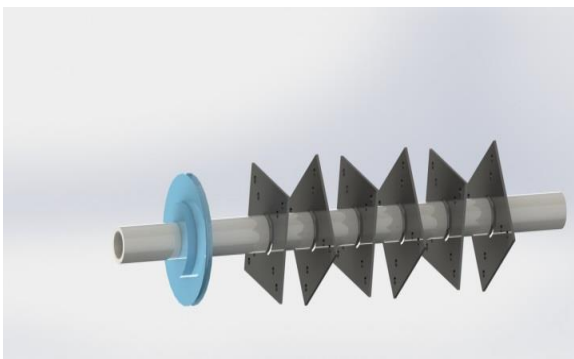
Horizontal plate welded to shaft assembly
